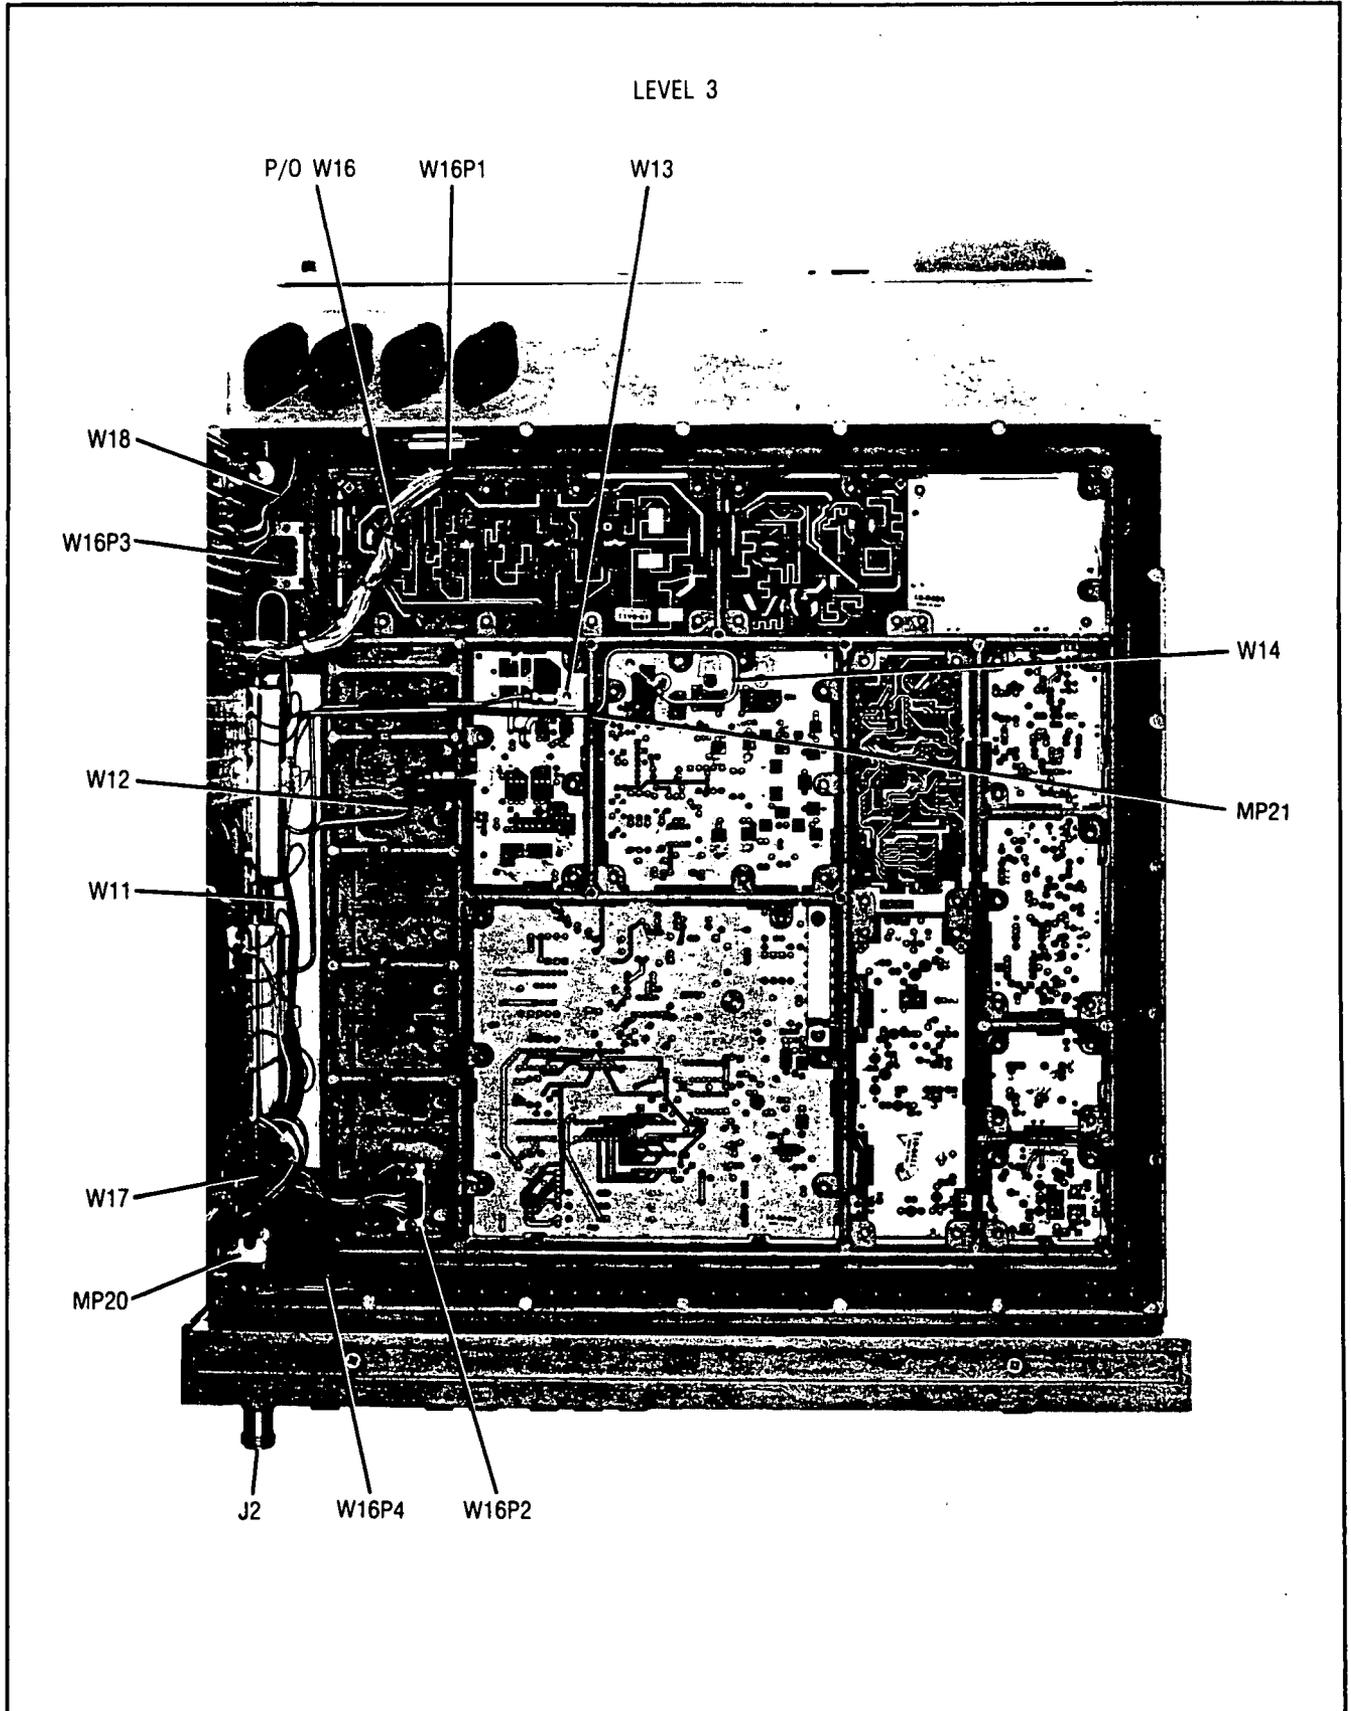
(2511A and above). Bottom Internal View; A10/A11 Assemblies in Service Position
